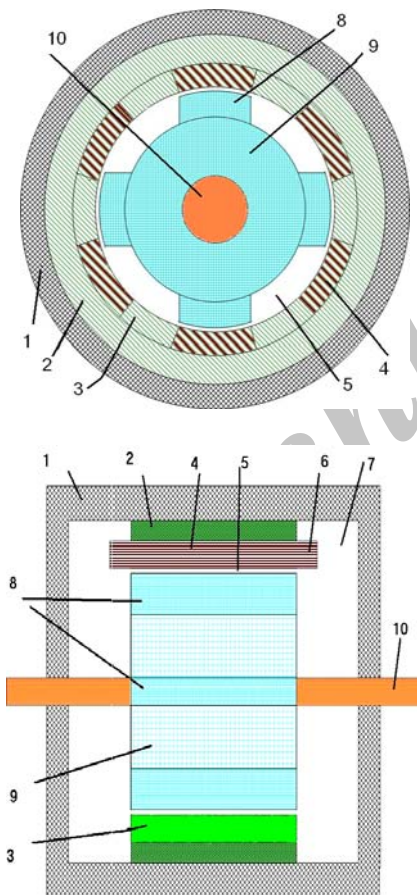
Two view of SR motor showing its various parts: 1-Frame 2-Stator yoke 3-Stator teeth 4-Windings 5-Air gap 6-Ending windings 7-Endcupping air 8-Rotor teeth 9-Rotor yoke 10-Axial shaft
